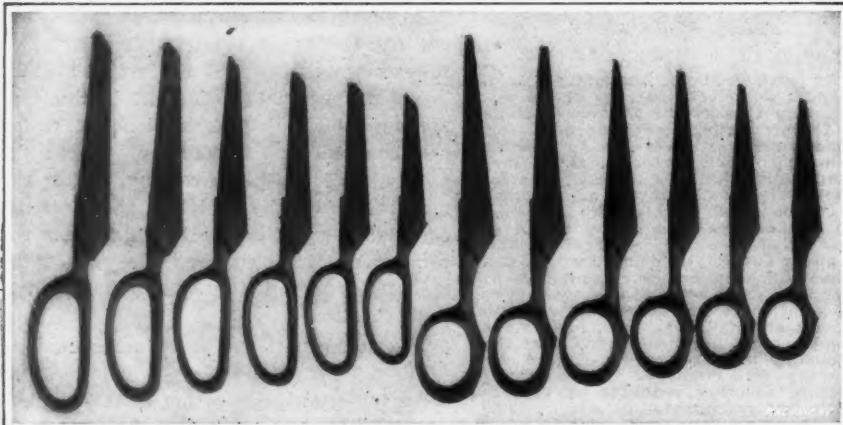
Scissor Forgings made in Dies cut on Reducing Machine from Two Models
